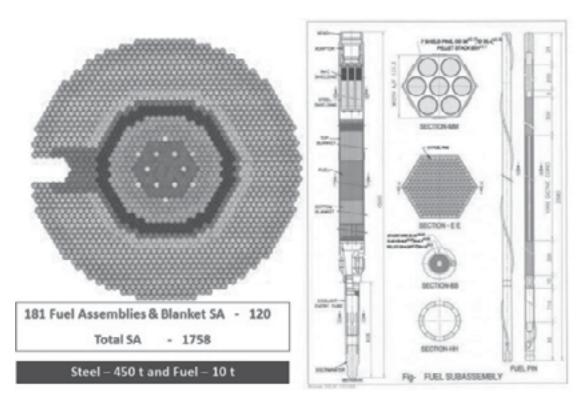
PFBR 500 Core With 181 MOX Fuel Assemblies In Centre Surrounded By 120 RDU Oxide Blanket Assemblies
